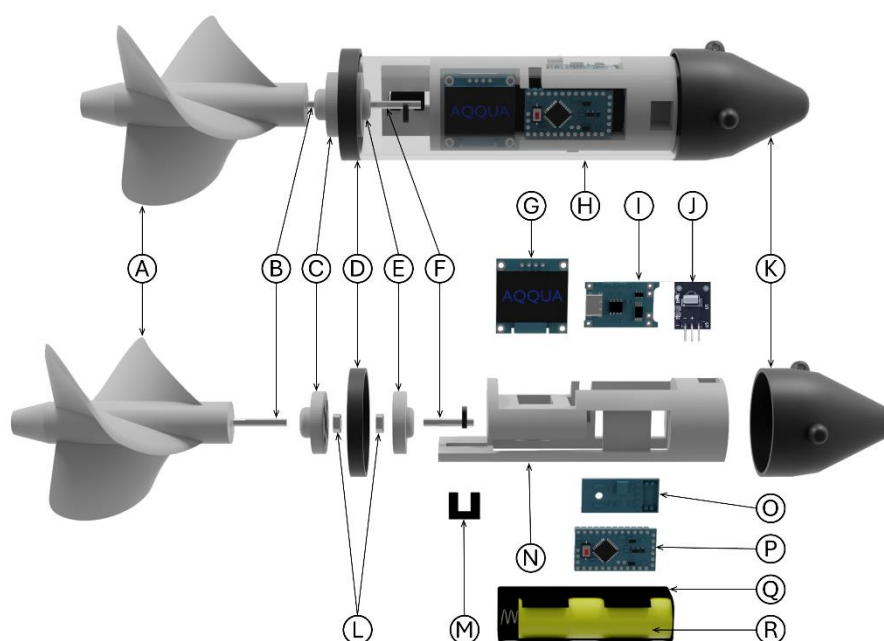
Exploded-view schematic illustration of the electromechanical flowmeter designed in this work. A: impeller, B: stainless steel shaft, C: outer bearing/magnets support, D: rear cap, E: inner bearing/magnets support, F: inner steel shaft with an offset pointer, G: OLED display module, H: acrylic tube, I: battery charging module, J: infrared sensor, K: nose cone cap, L: double shielded steel ball bearings, M: optical switch of the encoder speed sensor, N: structure for integrating electronic modules, O: encoder speed sensor module, P: Arduino Pro Mini board, Q: battery holder, R: rechargeable lithium battery.
